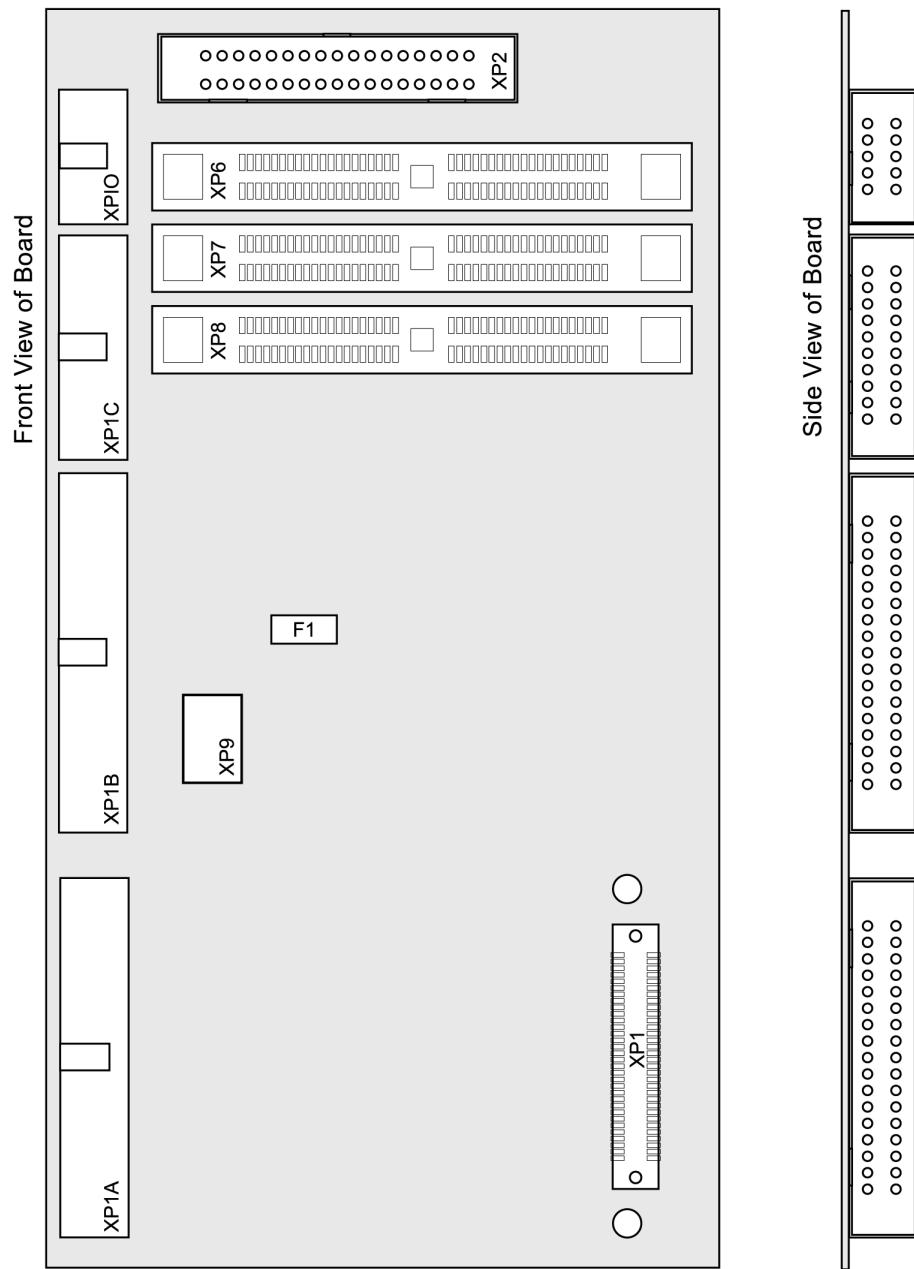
EXPAXIS (9-16) Axis Expansion Board for the ACR1505
